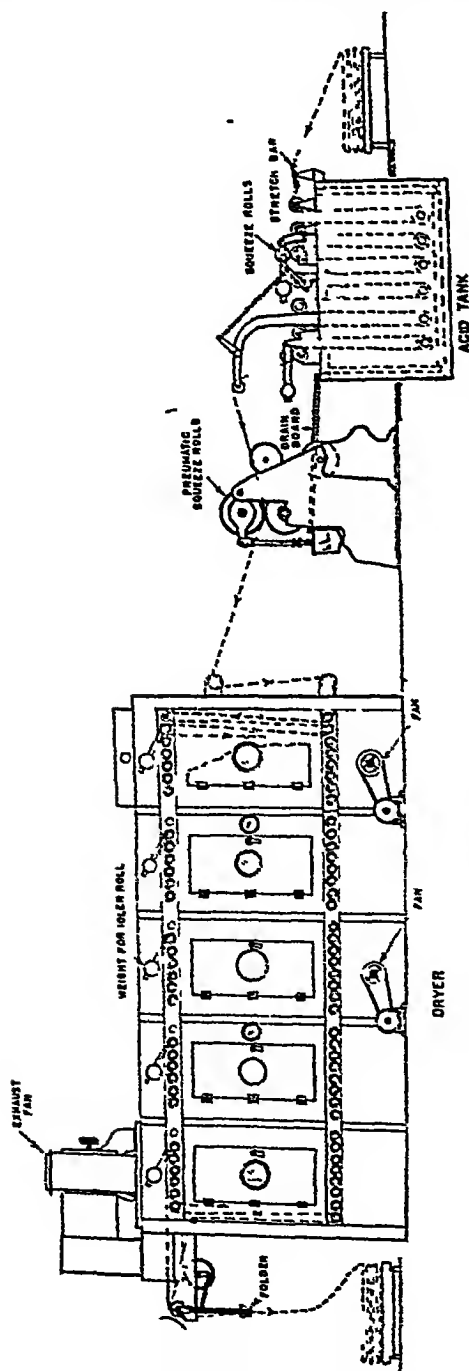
Continuous piece carbonizer Courtesy James Hunter Machine Co
